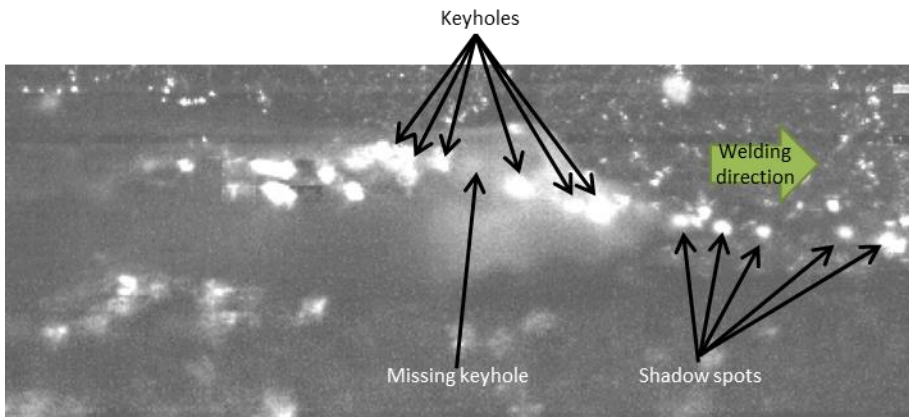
Welding with the seven spot DOE. Details of spot pattern are given in the paper “Beam shaping to control of weldpool size in width and depth”, Hansen et.al. [110].
